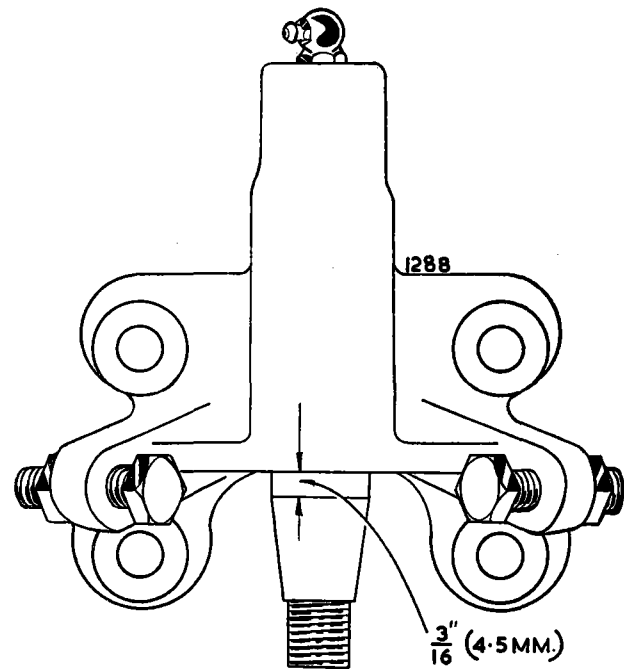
Setting dimension for the steering idler fulcrum pin.
